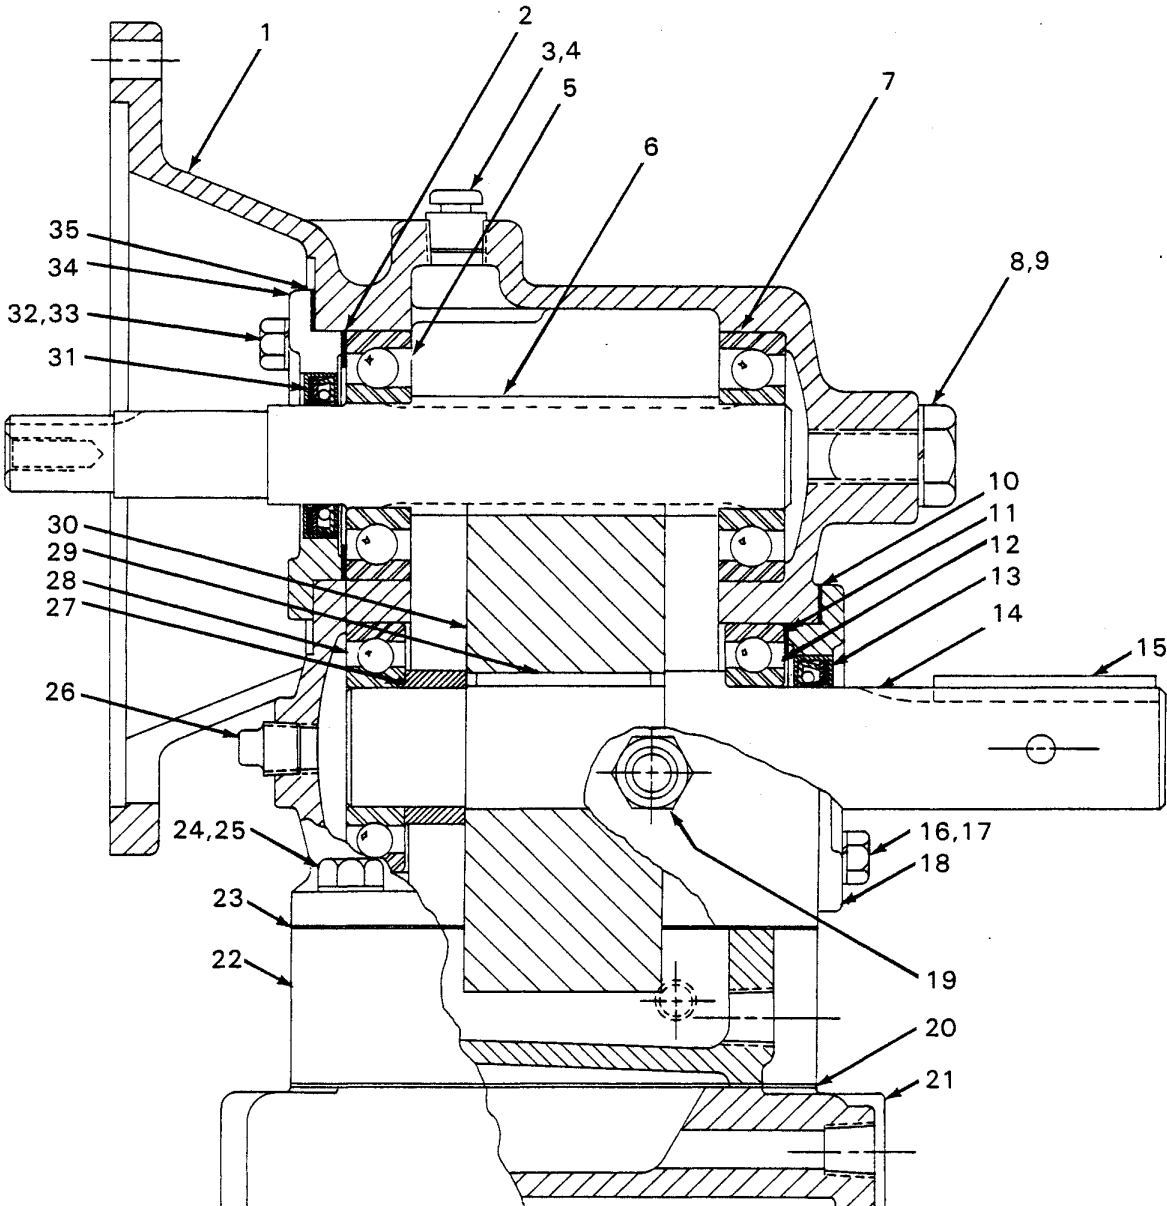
GRP44-12 Gearbox for Pump Model 63A3-GA
